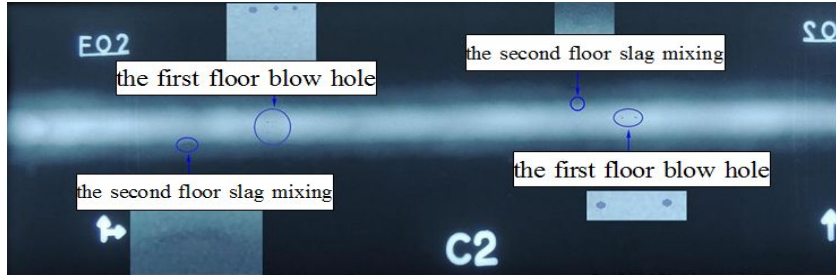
X-ray radiographic test film of shielding gas CO<sub>2</sub> 100% welding specimen by opening angle 60°
